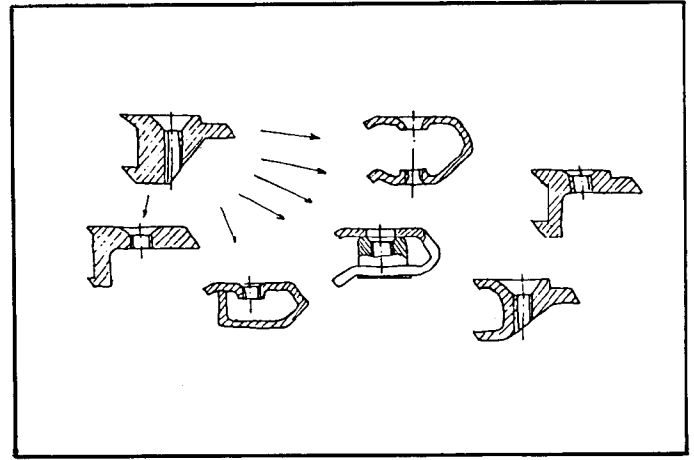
Alternative designs for the clamping piece shows in fig. 3. The functional surfaces are unaltered, but new component shapes are indicated.
